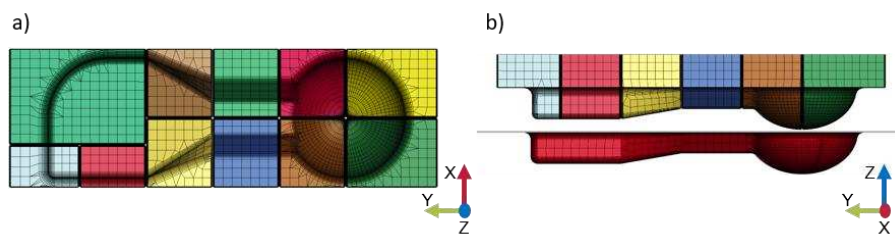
a) Top view and b) side view of the developed demonstrator geometry
